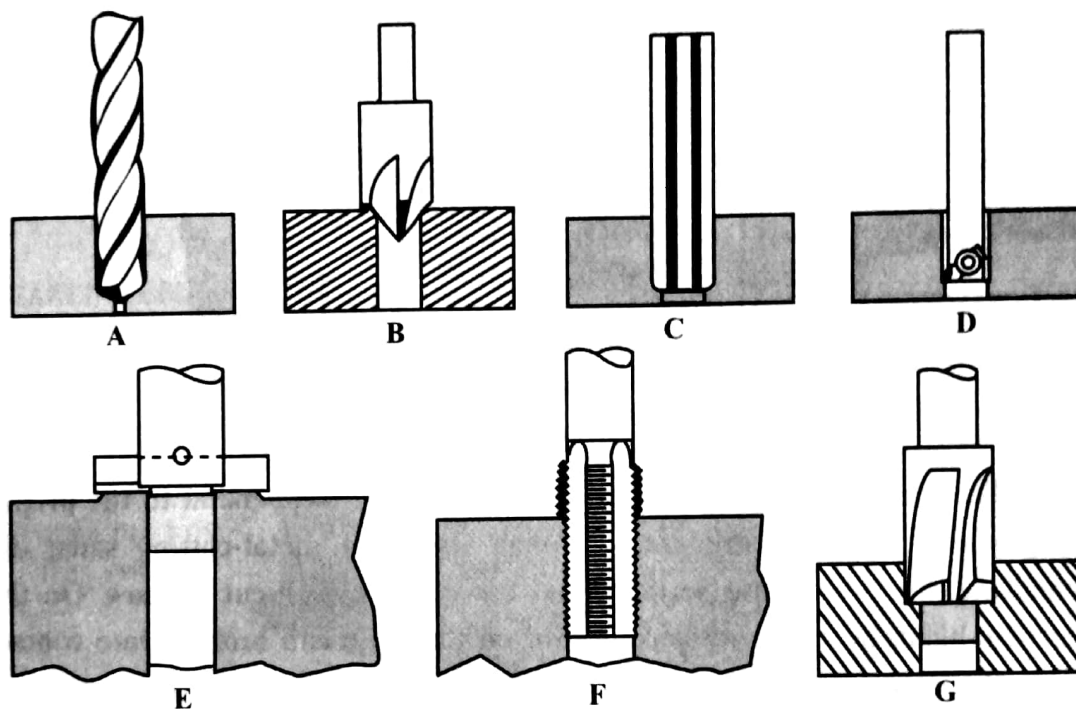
(A) Drilling produces a straight hole; (B) countersinking produces a cone-shaped hole; (C) reaming is used to finish a hole; (D) boring is used to true and enlarge a hole; (E) spot-facing produces a square surface; (F) tapping produces internal threads; (G) counterboring produces square shoulders in a hole.
